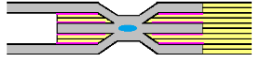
Example of the manufactured 'resistance weld reinforced adhesive joint' test specimens
